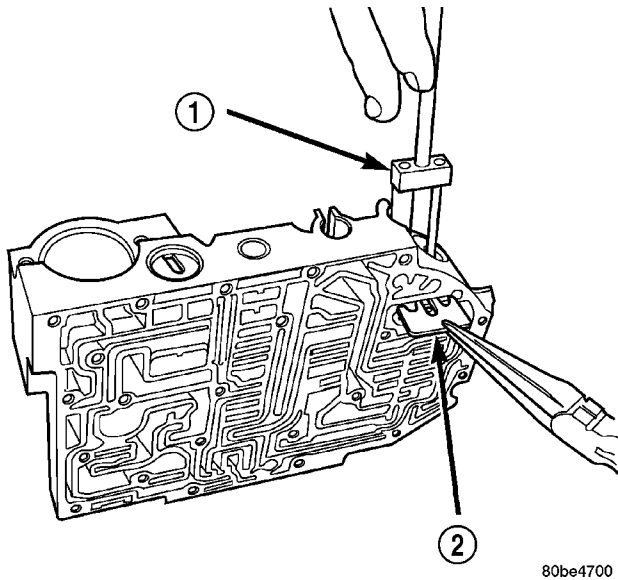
Remove Dual Retainer Plate using Tool 6301
